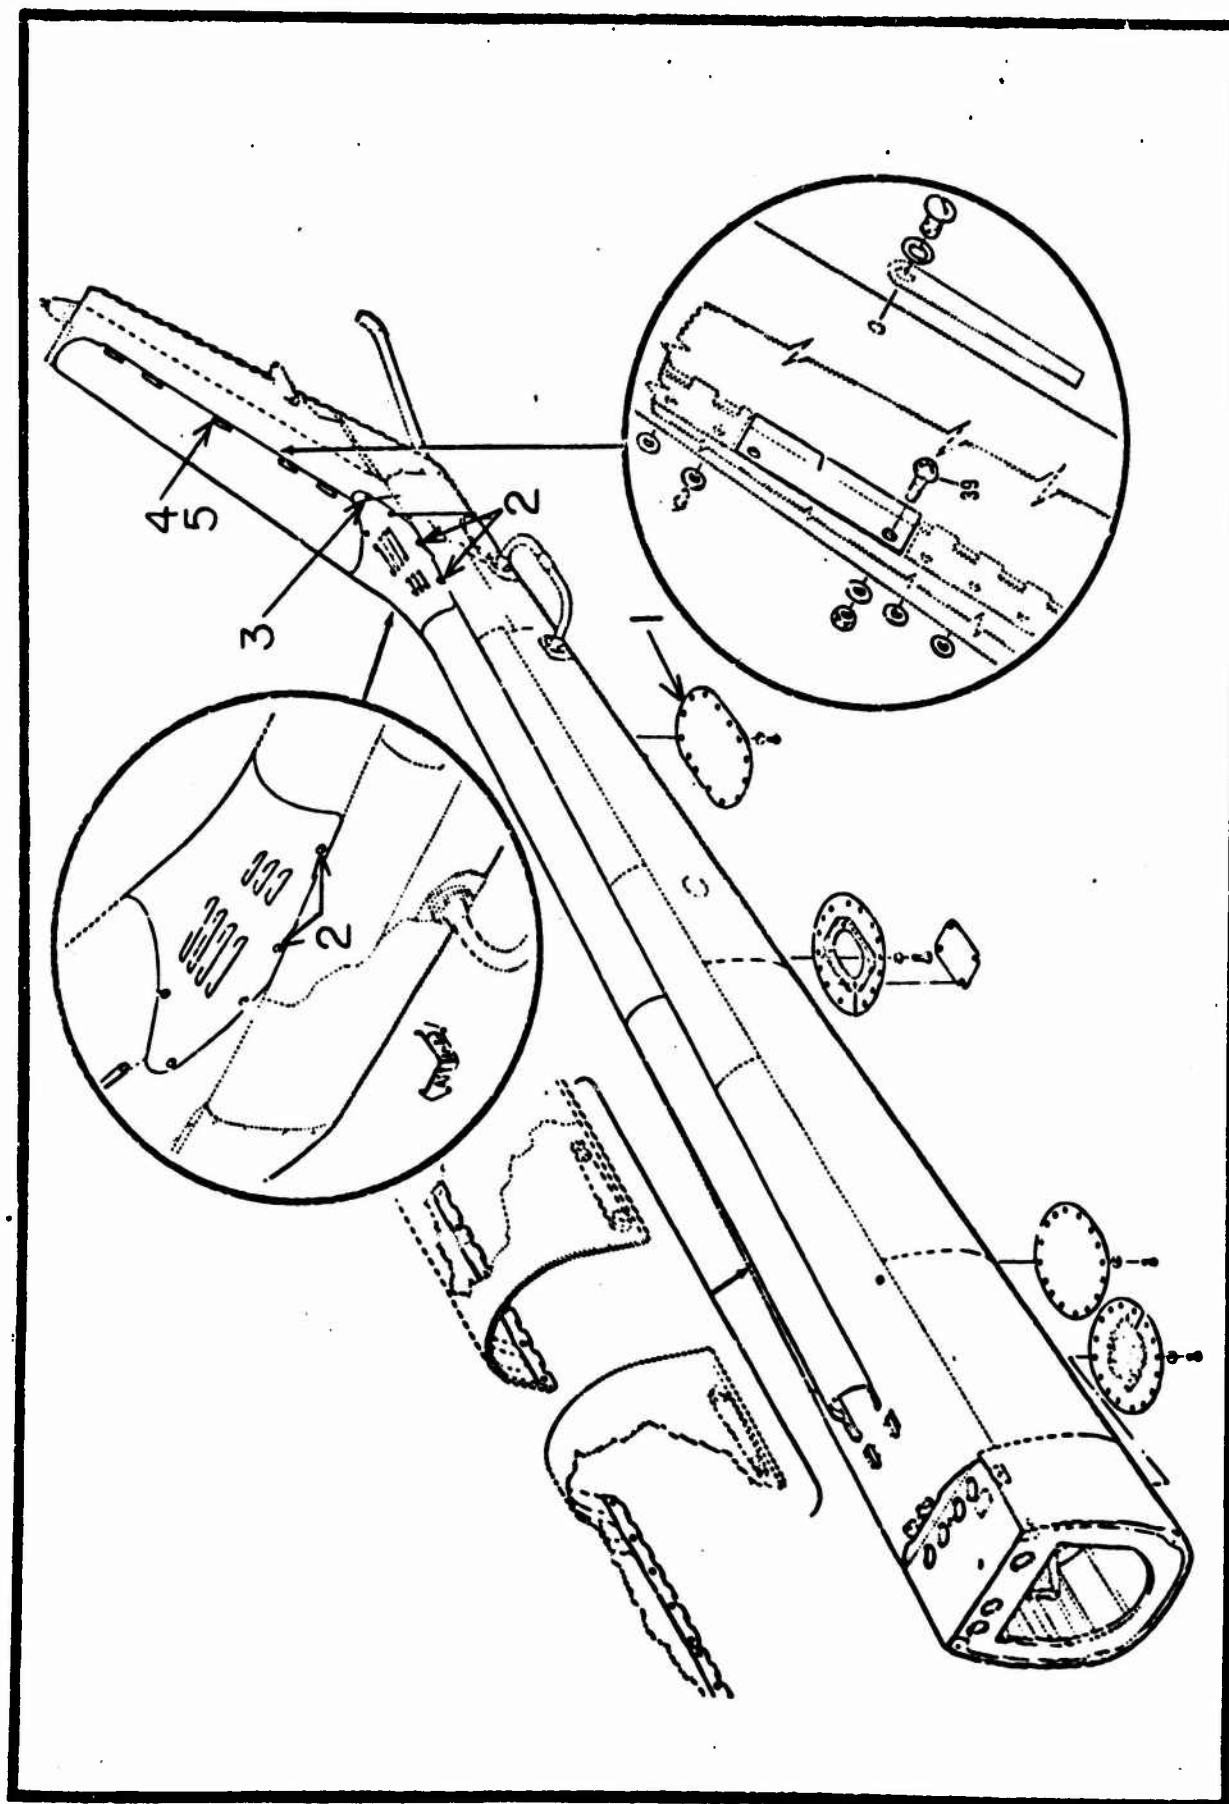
Door Installation, Access, Tail, Rotor Shaft
